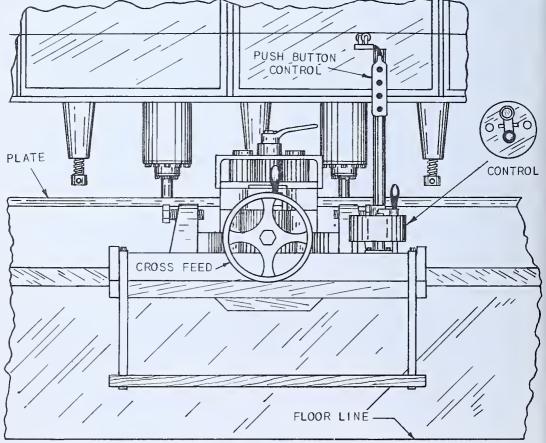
Tool\ Carriage\ and\ Operator's\ Platform$
